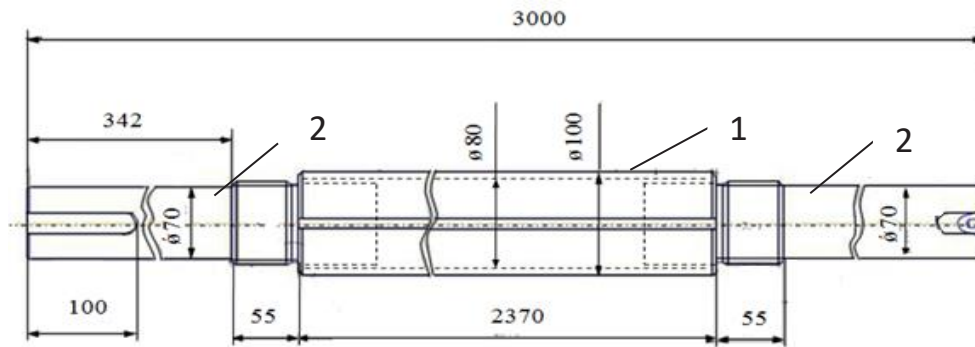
Structural dimensions of a hollow shaft with pins of a genie brand 5DP-130: 1 - hollow shaft, 2 - pins.
